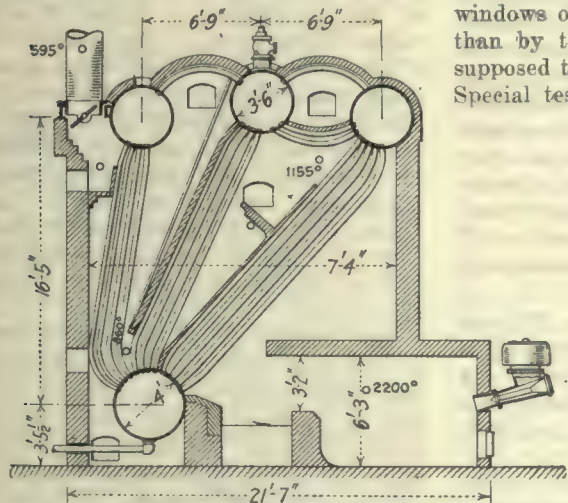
GAS BURNER INSTALLATION IN 500 H.P. STIRLING BOILER, AT PITTSBURGH STEEL CO. PLANT, MONESSEN, PA.
